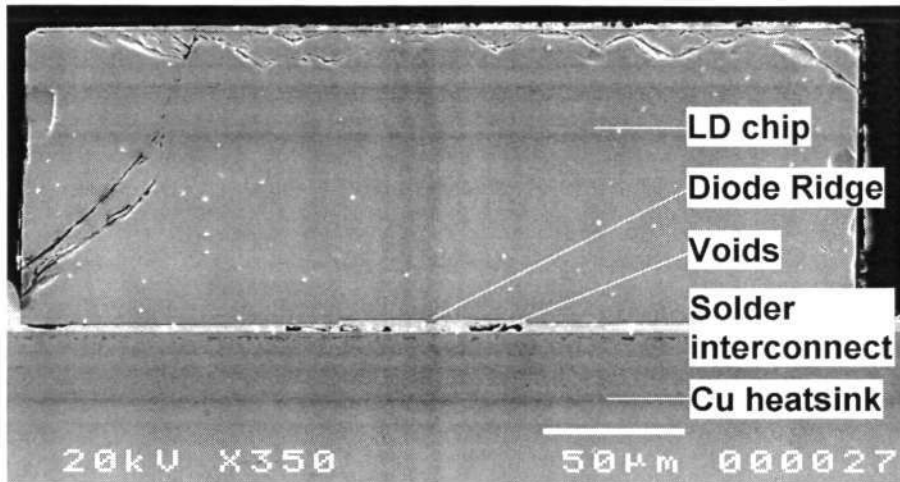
Typical cross-sectional view of insufficient bonding contact at the solder interface.
